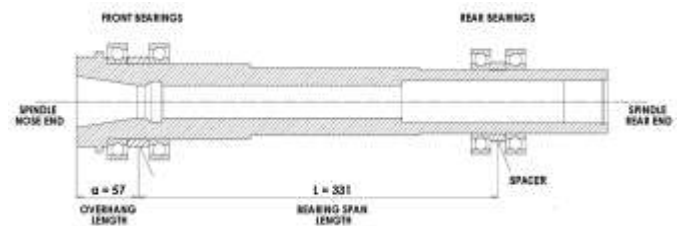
Bearing Arrangement 3 with Span Length 331 mm
